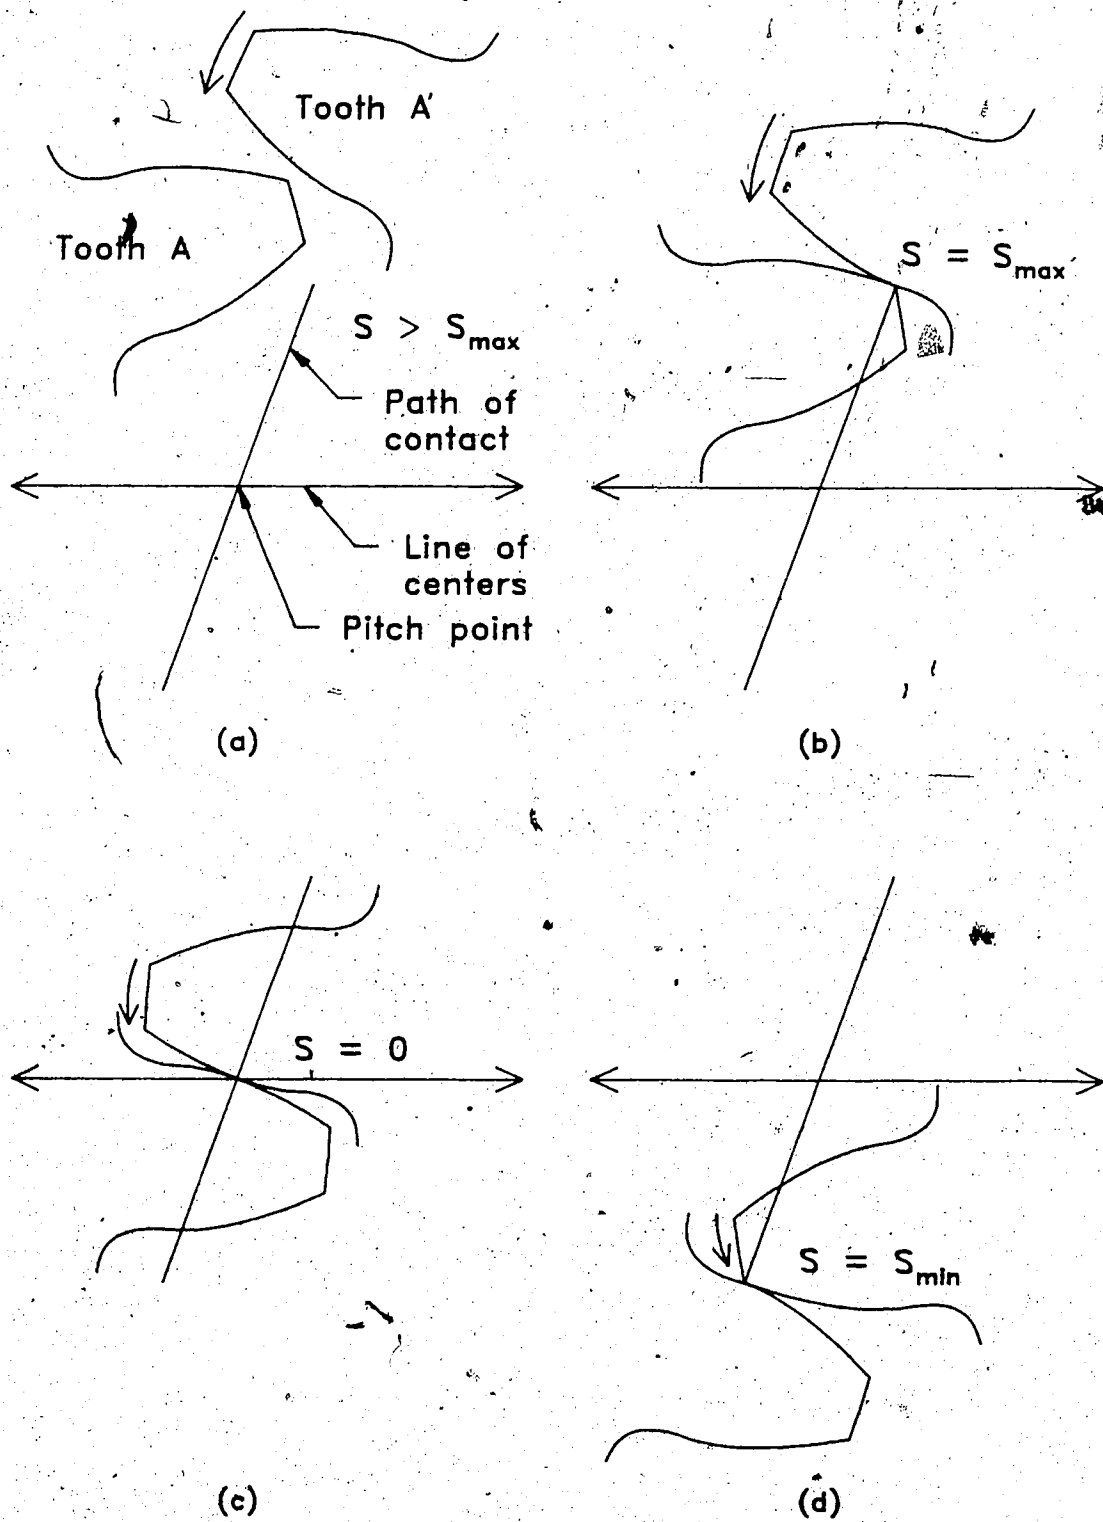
A progression showing Tooth A' drive Tooth A.
